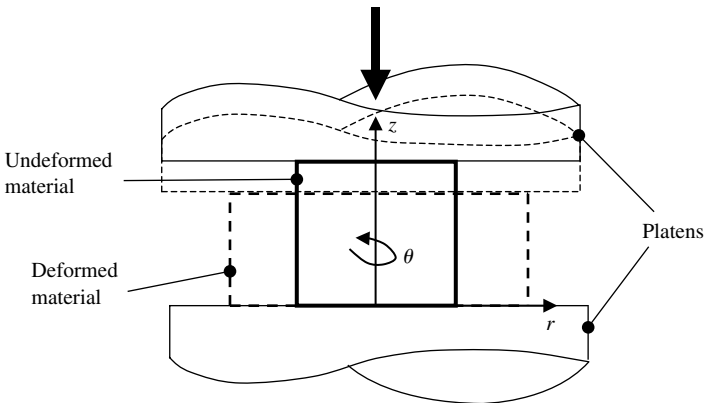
Frictionless, uniaxial compression representing open-die forging.
